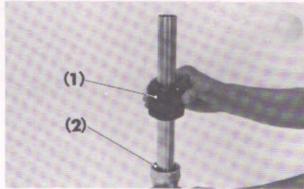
(1) Fork seal driver (2) Oil seal
